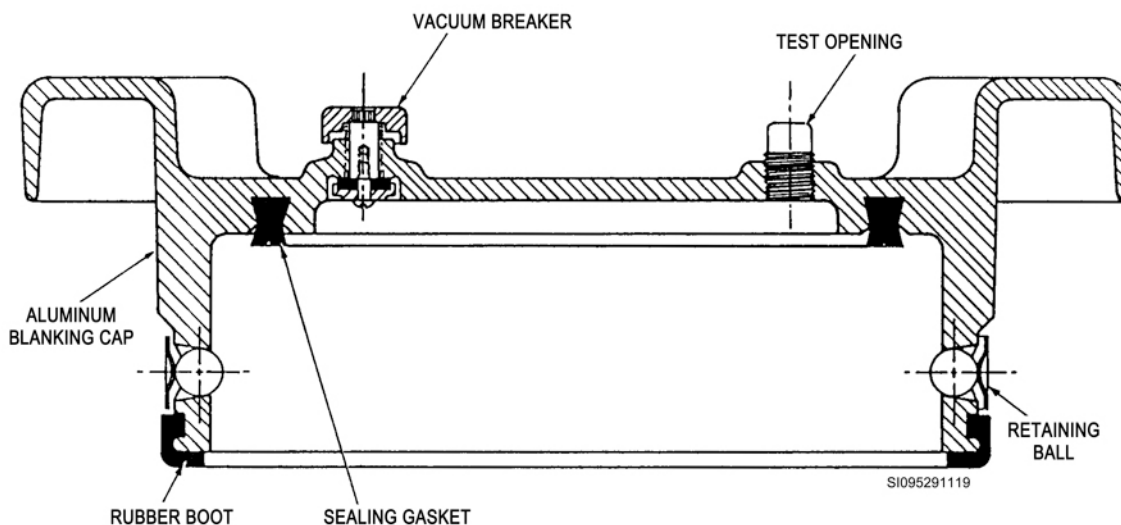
X73 Aluminum blanking cap. (By courtesy of Cla-Val Co.)
